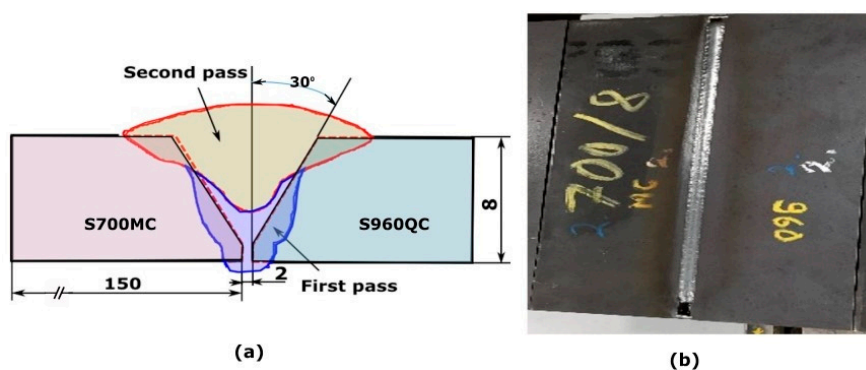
Weld geometry: (a) weld joint geometry, (b) welded appearance of one specimen.
